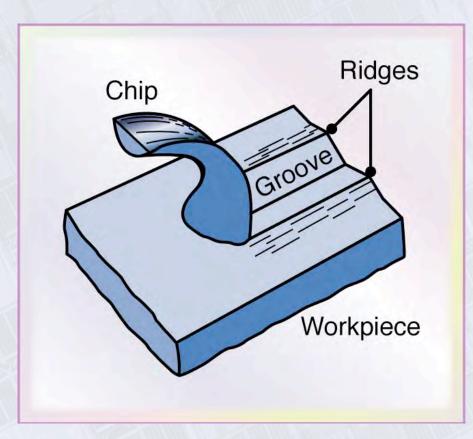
Chip formation and plowing of the workpiece surface by an abrasive grain.
